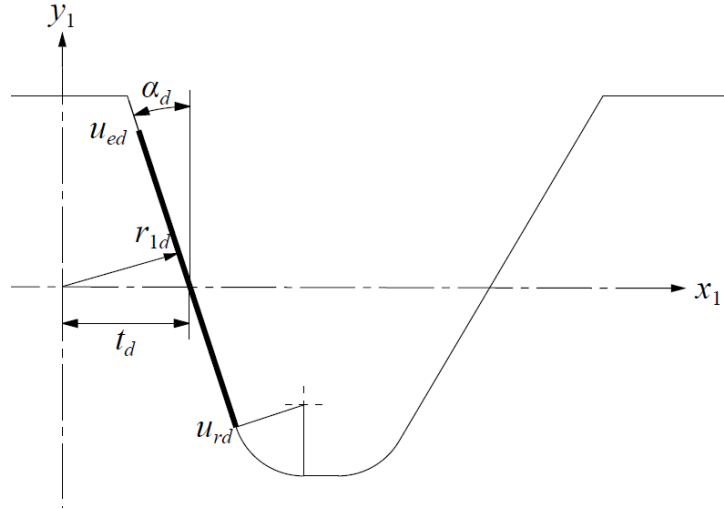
The position vector of asymmetric rack-cutter drive side inclined surface
